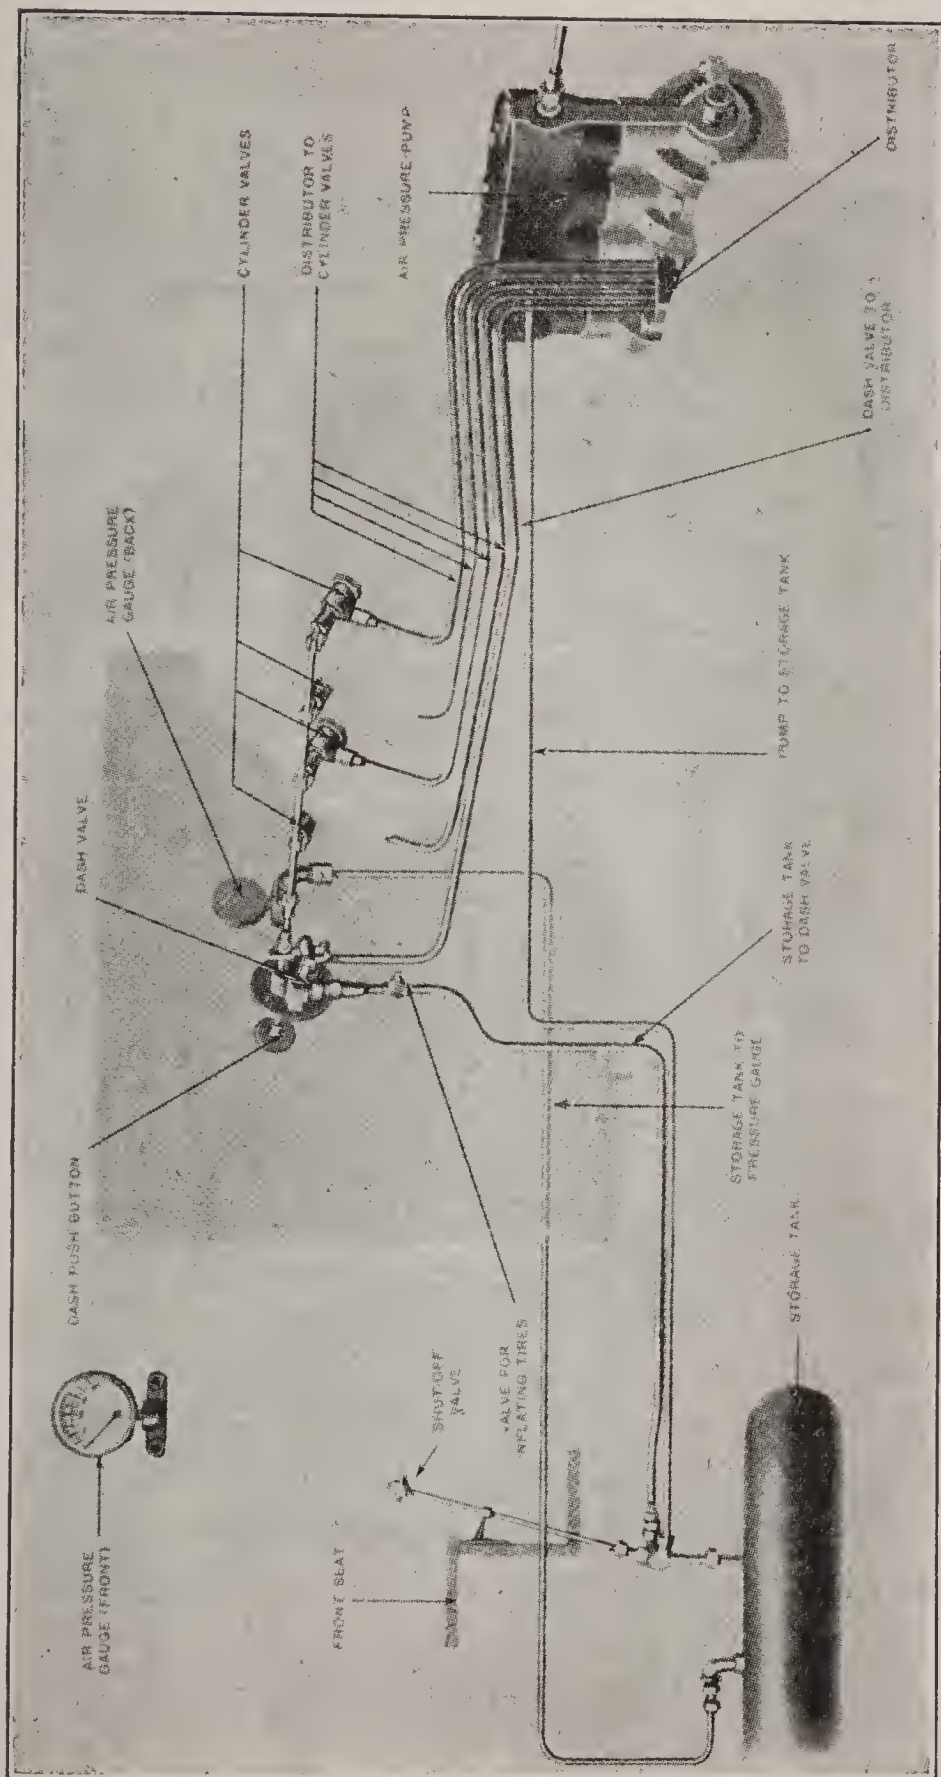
Chalmers Air Pressure Starting Mechanism.
